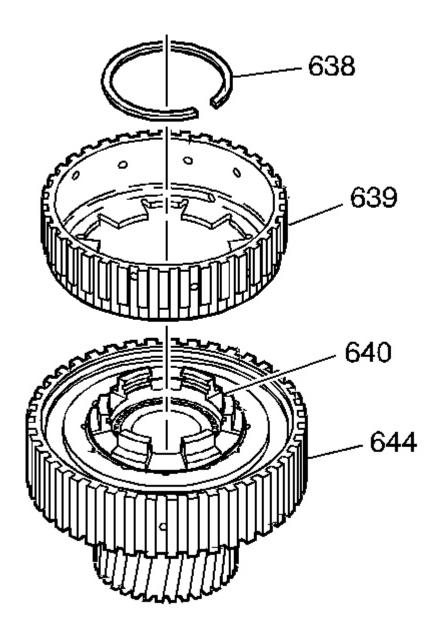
Locating Overrun Clutch Courtesy of GENERAL MOTORS CORP.
